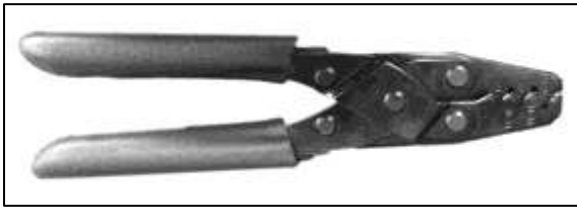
Open Barrel Crimping Tool 14-24 AWG
